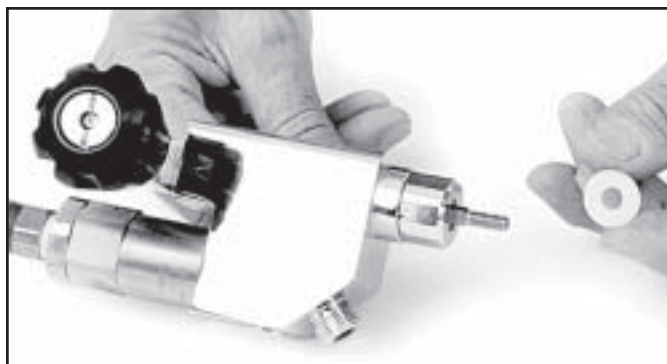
Don't forget to install the washer before installing the valve knob.
